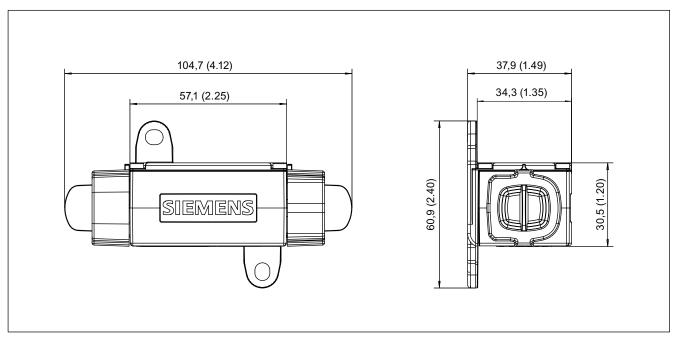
Dimension drawing of the DRIVE-CLiQ coupling, all dimensions in mm and (inches)
